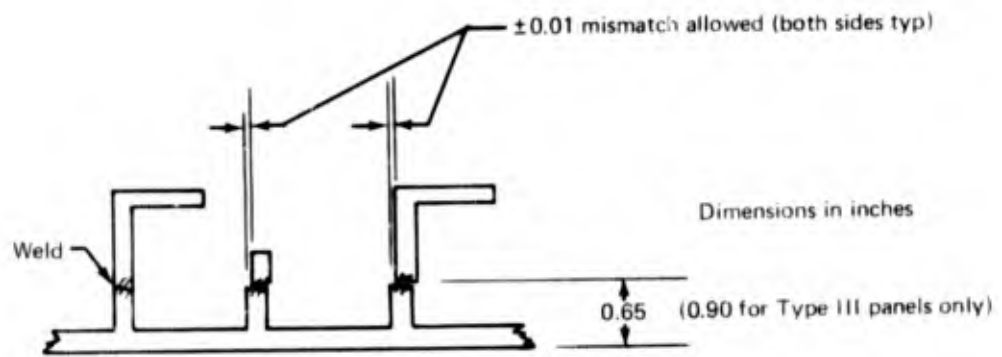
PANEL WELD LOCATIONS
